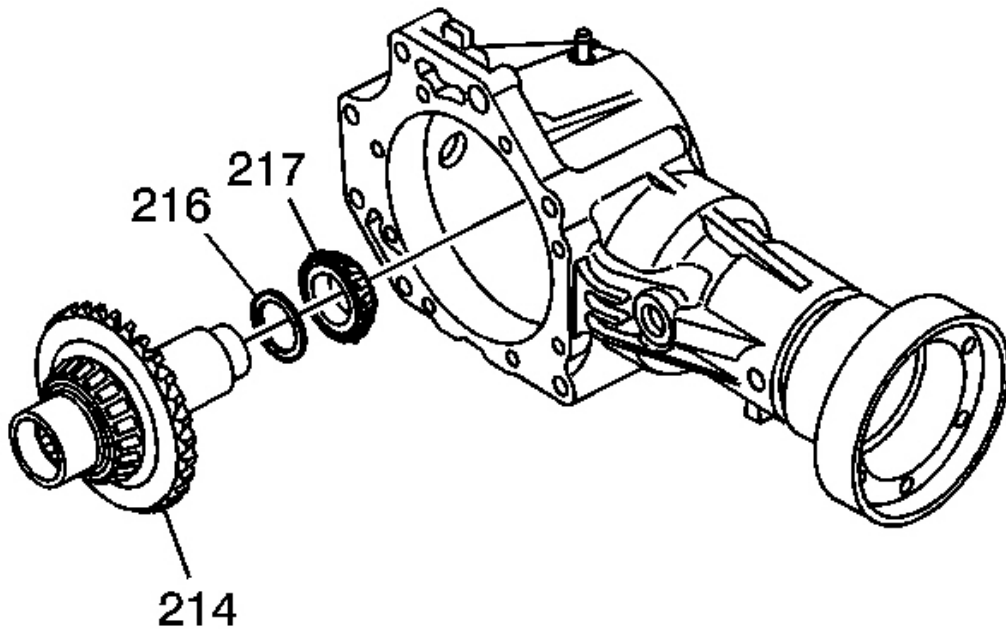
Removing/Installing Input Gear, Bearing & 25 mm Shim
